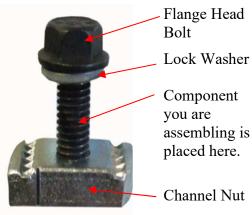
All Bolts requiring a Channel nut must be assembled in the following fashion. This is a Bolt and Channel Assembly. This does not come as an assembled part. You have to assemble each as required in the instructions.
